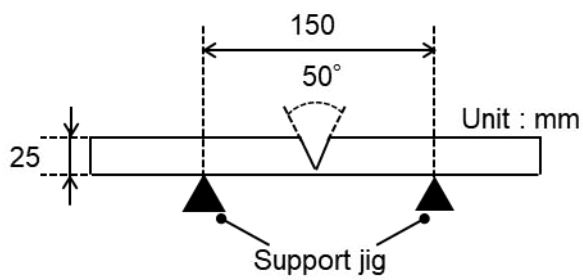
Specimen support method using angle material during welding.
